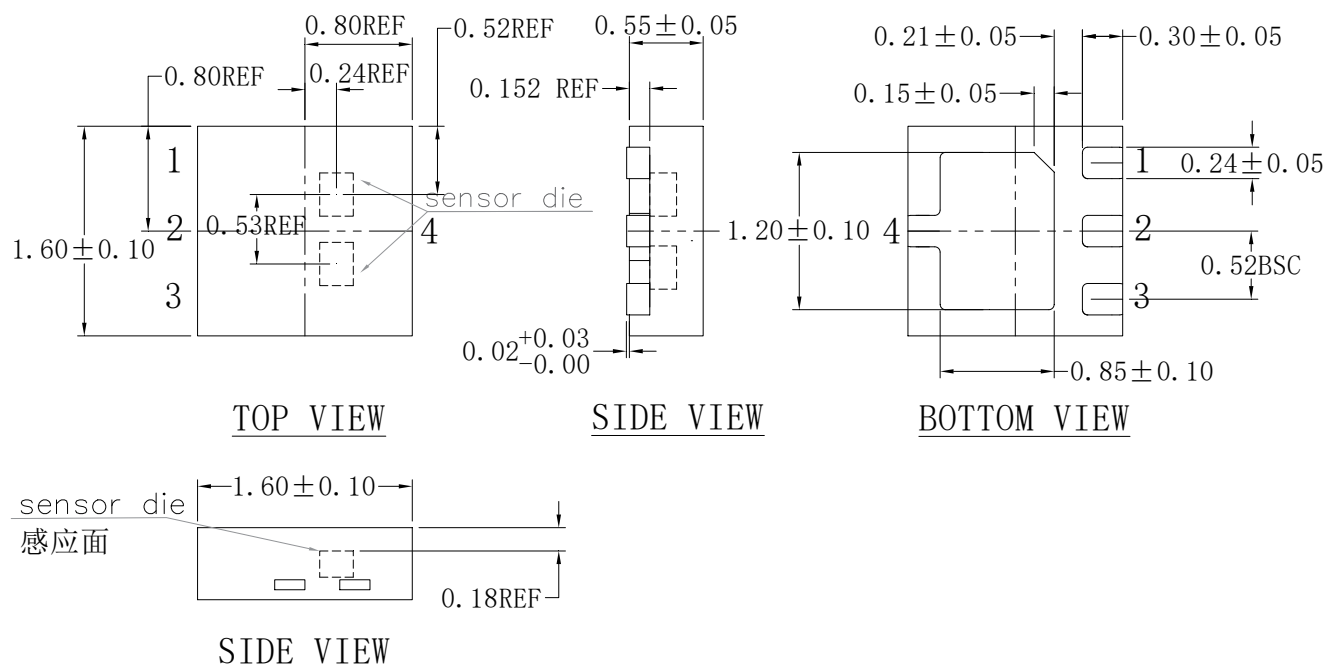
the dimensions of the packaged chips, and the position of sensing area(unit: mm).
